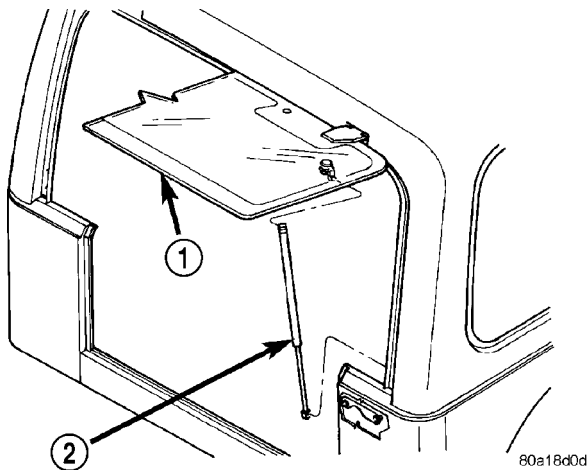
SUPPORT ROD CYLINDER REMOVAL
